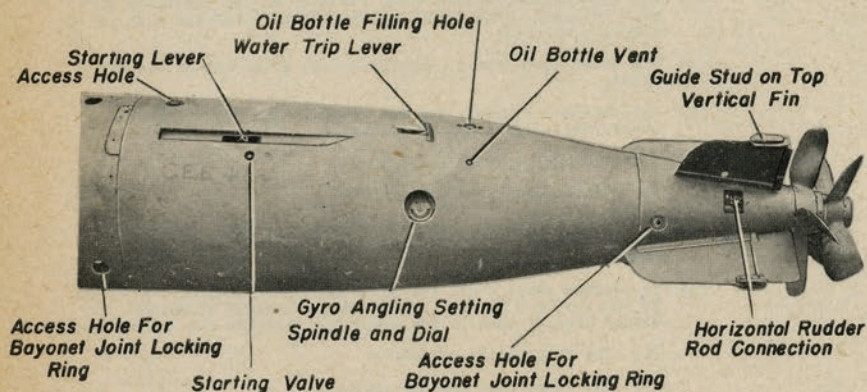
Torpedo Type 89 Mod 1, Afterbody, Portside
